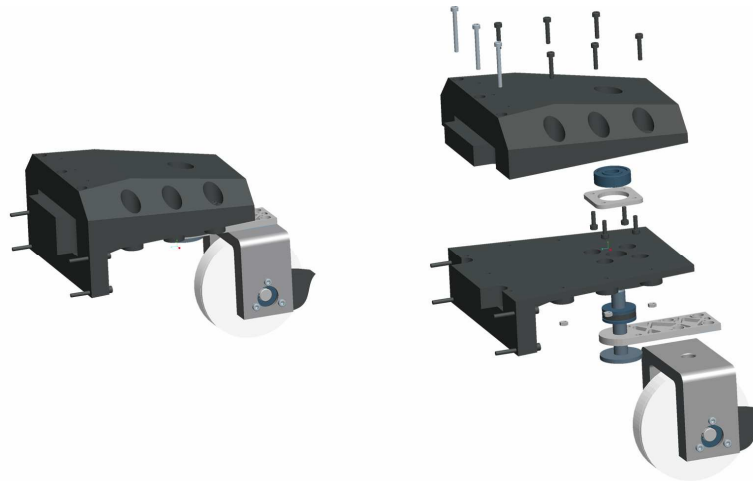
REAR (LEFT) AND EXPLODED (RIGHT)
